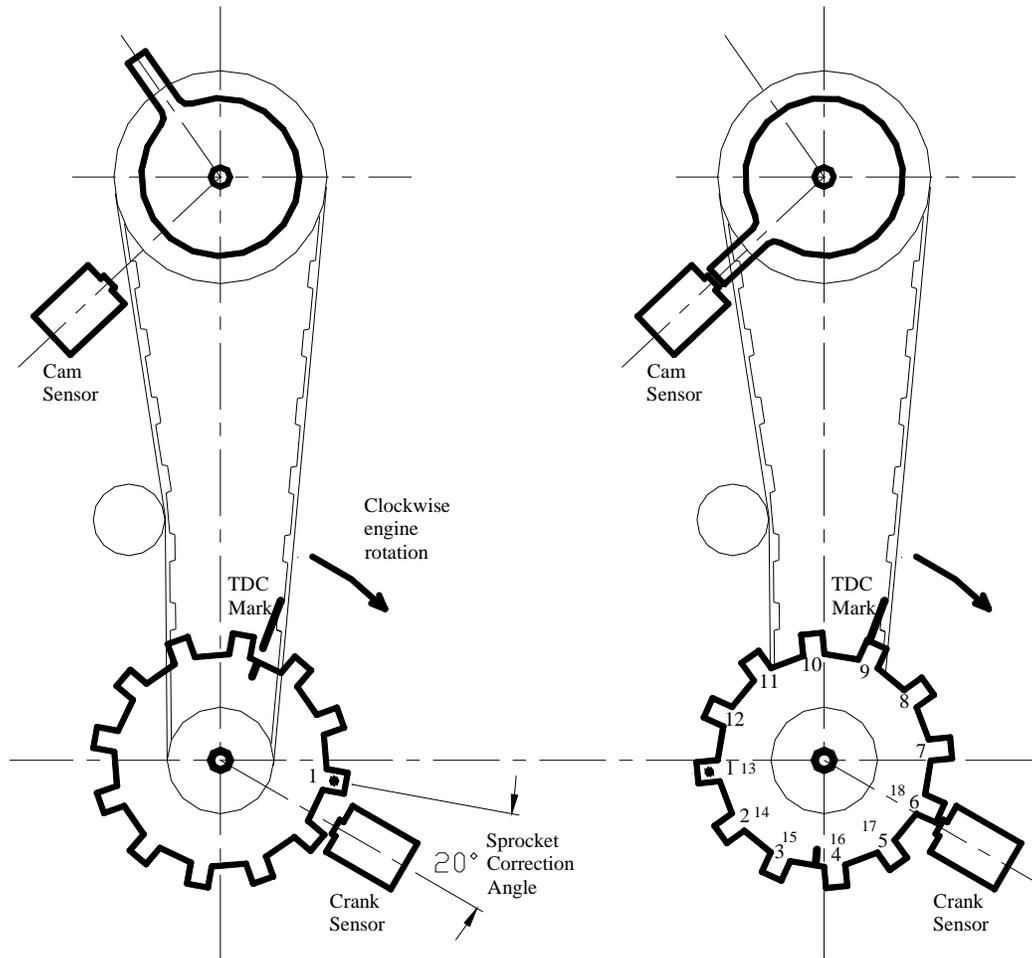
Case 1, Left: Determination of Sprocket Correction Angle and Tooth No 1, Right: Determination of Tooth at Cam Sensor
